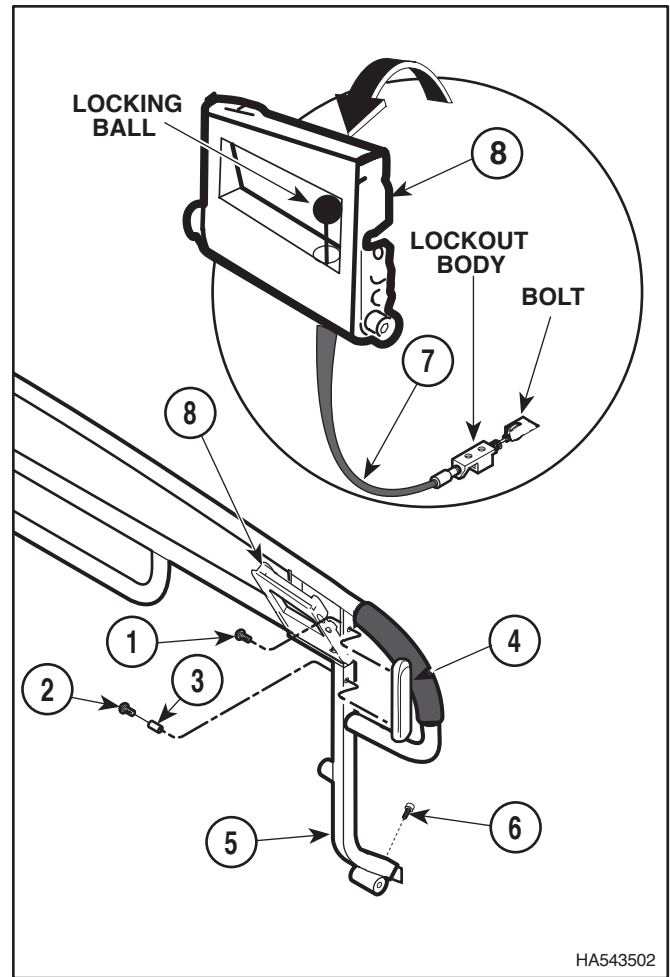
750N and 750W Siderail Latch Assembly Removal / Installation
